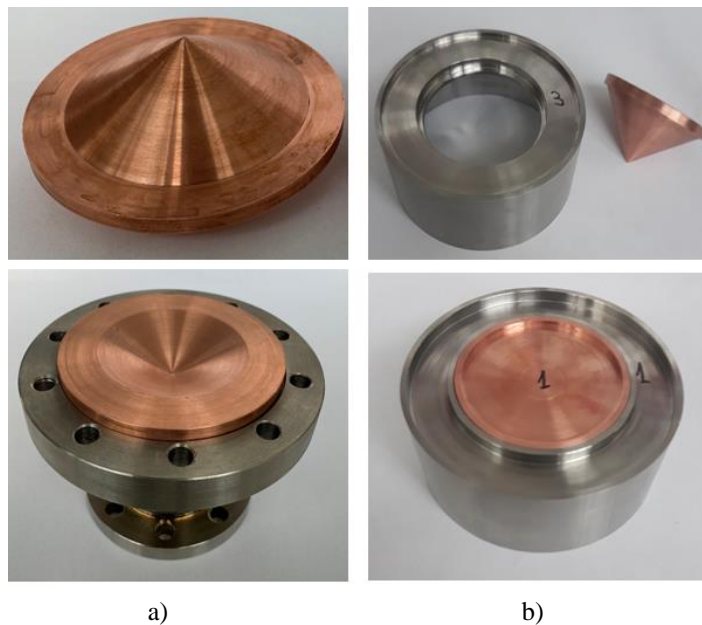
Mounting options: a) removable ( flanges with screws )
